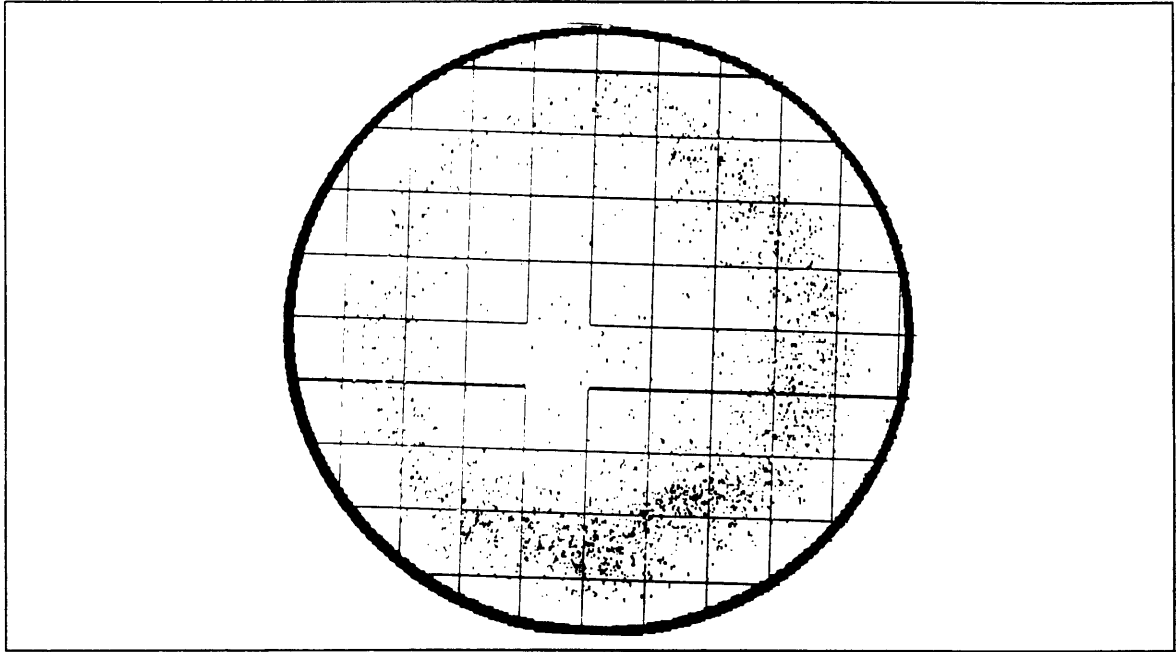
Cheerio defect pattern from blanket film monitor tool.
